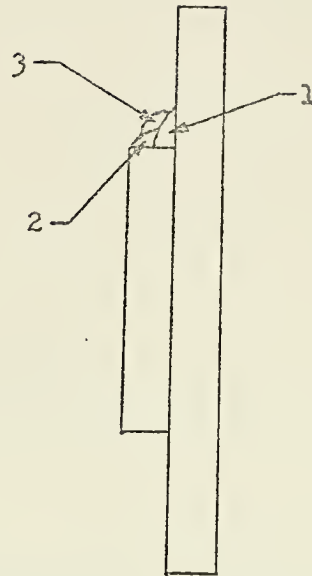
WELDING SEQUENCE FOLLOWED FOR THE UNDERWATER WELDING OF
